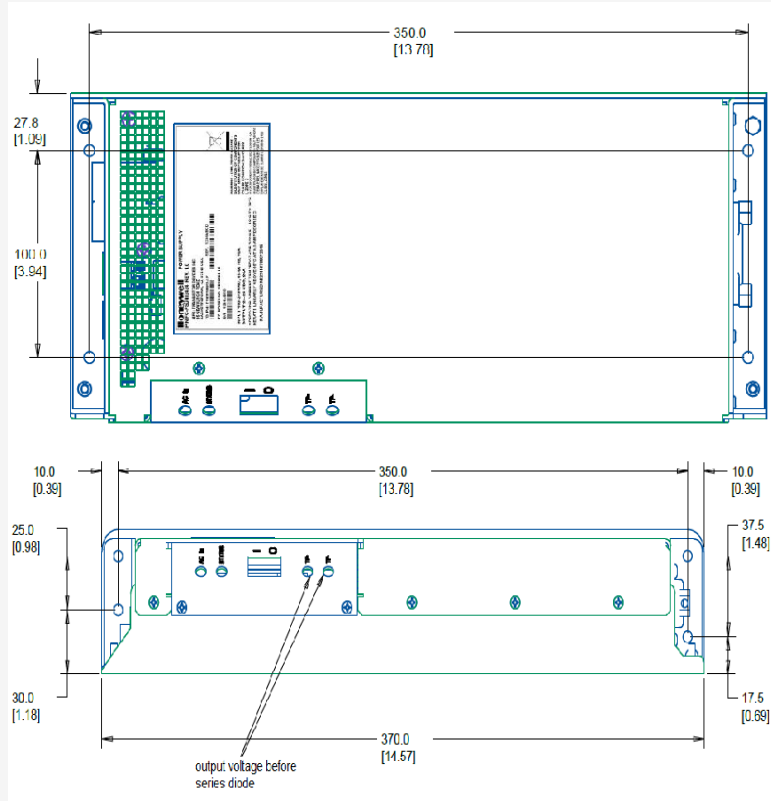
Mounting holes of the PSUNI2424 power supply
